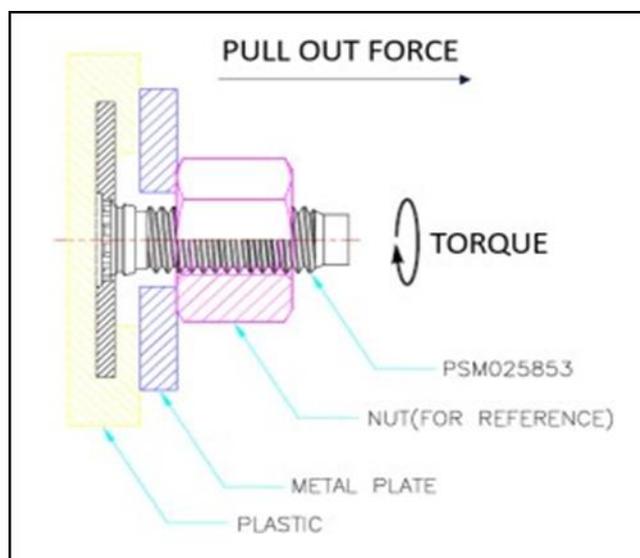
Schematic diagram of the actual bolted assembly, Failure specimen
